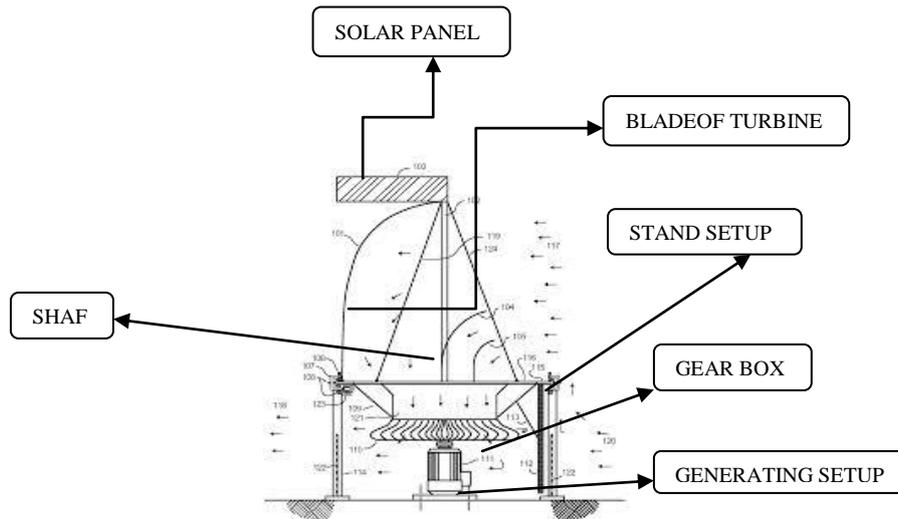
CROSSSECTIONAL VIEW OF THE DESIGNED EQUIPMENT:
